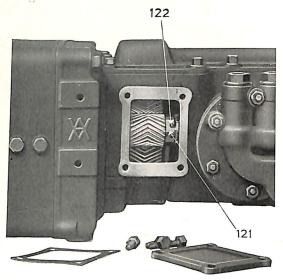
Hand Hole Cover Removed, Showing Pinion
